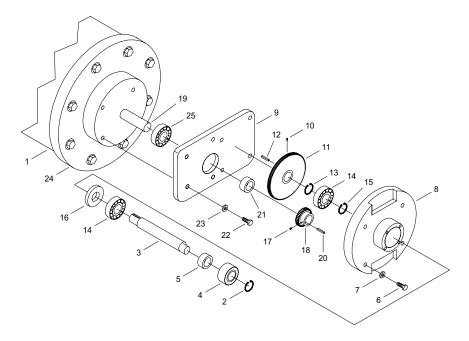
Fuel Additive Injector Pump Bearing Housing.
